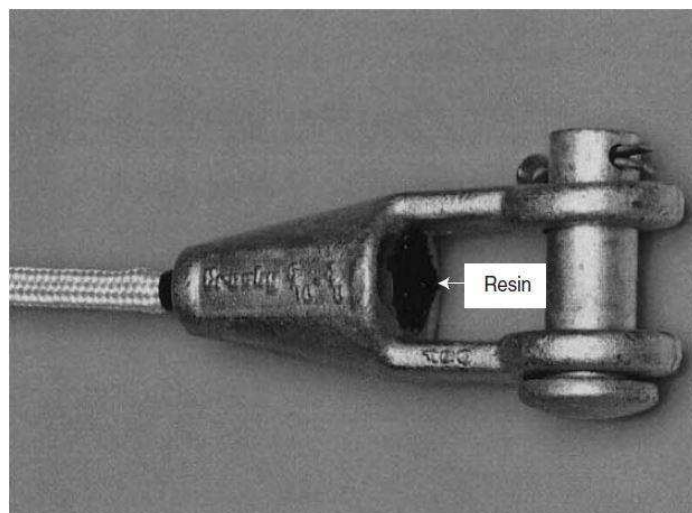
Socketed termination. Socketing resin can be seen at the top of the cone [34]
